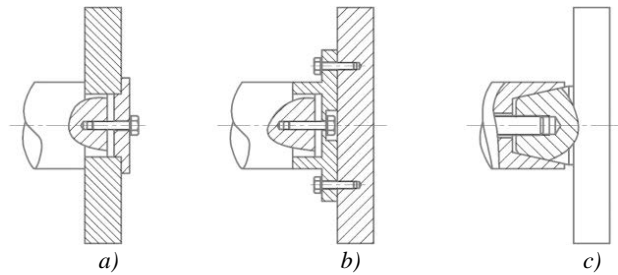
Fitting options for a nozzle ultra-fast grinding wheel with heel: a) nozzle mount; b) striking mount; c) end mount.
